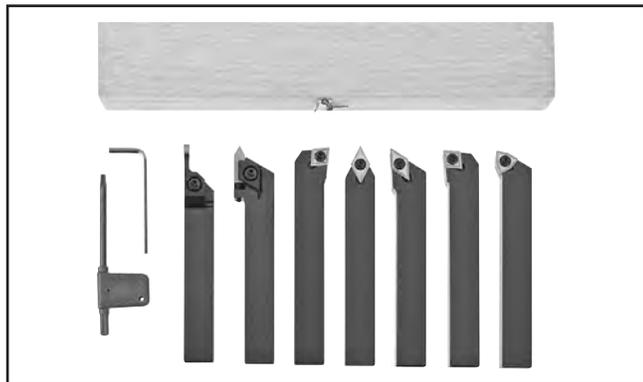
T10295 7-Pc. Indexable Carbide Tool Set.
